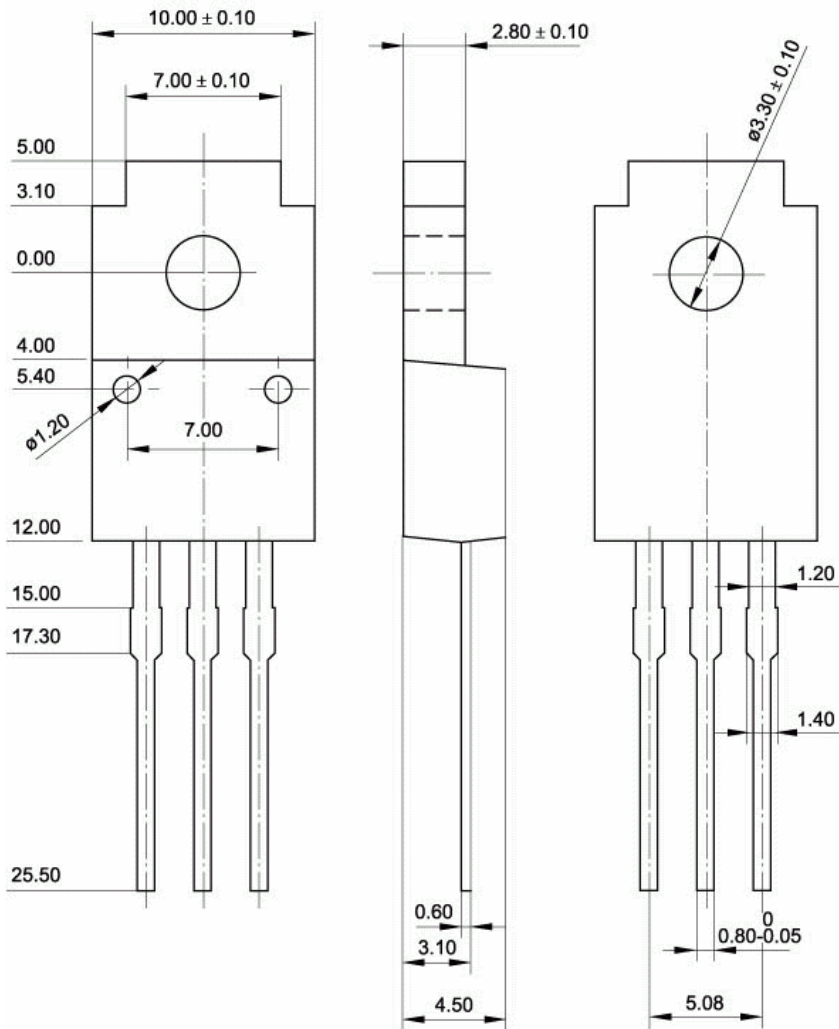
outline dimensions (unindicated tolerance:  $\pm 0.15$  mm)
